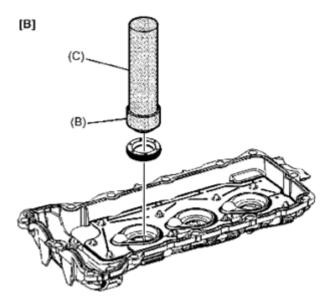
Identifying Bearing And Seal Driver Courtesy of SUZUKI OF AMERICA CORP.
